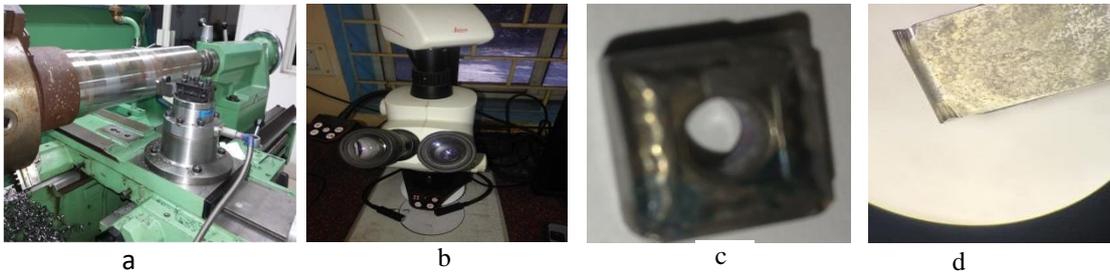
a. Experimental setup on lathe, b. Tool makers microscope, c. Uncoated carbide tool insert, d. Tool flank wear observed in microscope
